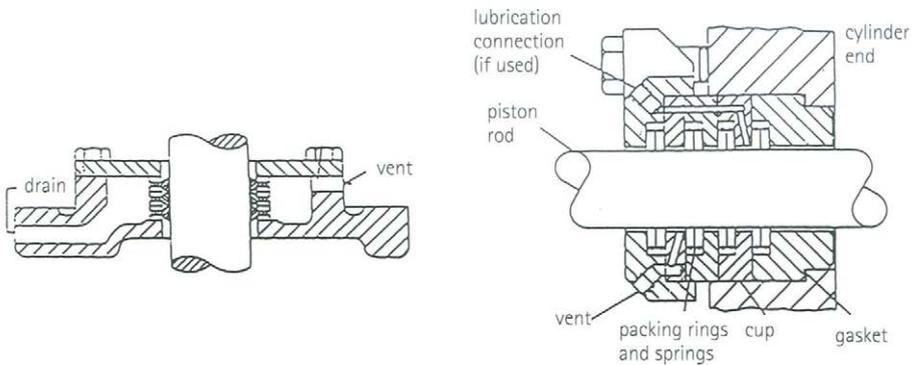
Left: Oil scraper ring arrangement for 9" & 11" ESH/V, HSE units; Right: Piston rod packing (Courtesy of Dresser Rand)
